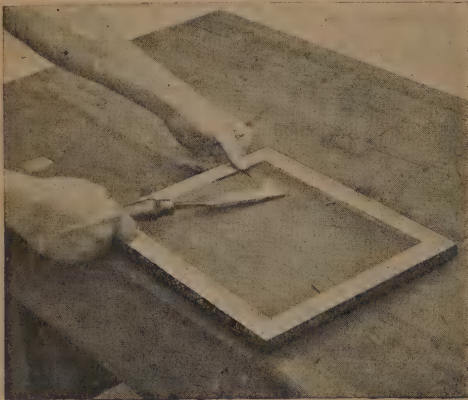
Driving Picture Frame Sprigs with Old Chisel
